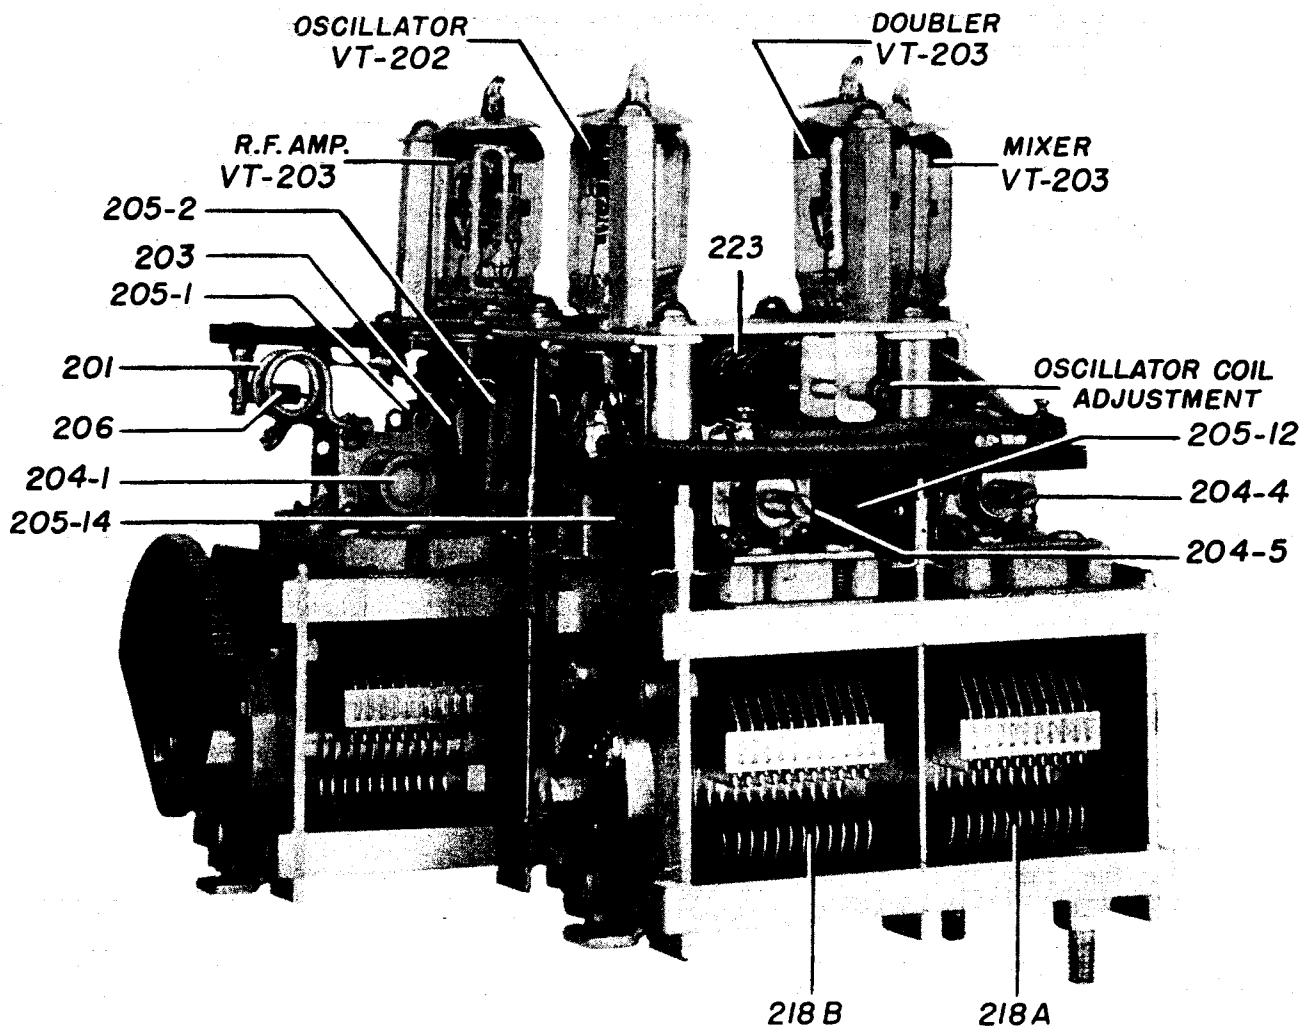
Radio Receiver BC-639-A, Front Oblique, R. F. and Oscillator
